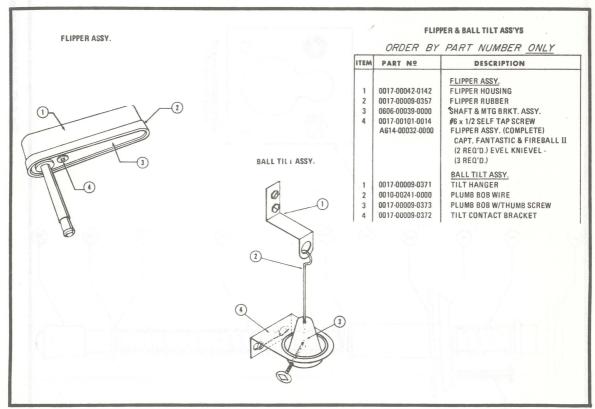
Flipper arm and tilt mechanism with parts lists.
